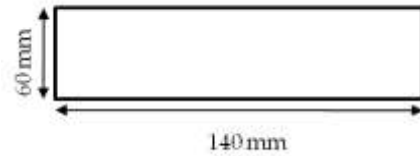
Dimensions of a standard sample for tensile test (Length: 140mm, width: 60mm, and thickness: 1mm)
